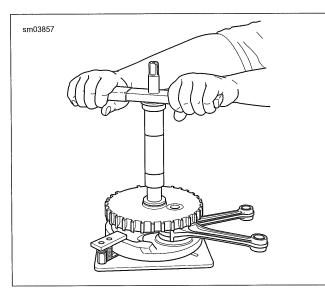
Press Inner Race onto Sprocket Shaft: Operation
